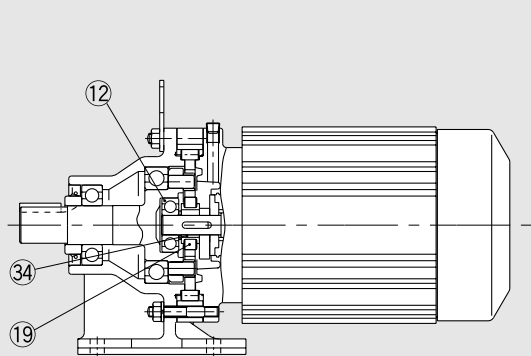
Type CNHM (Horizontal-Gearmotor)
